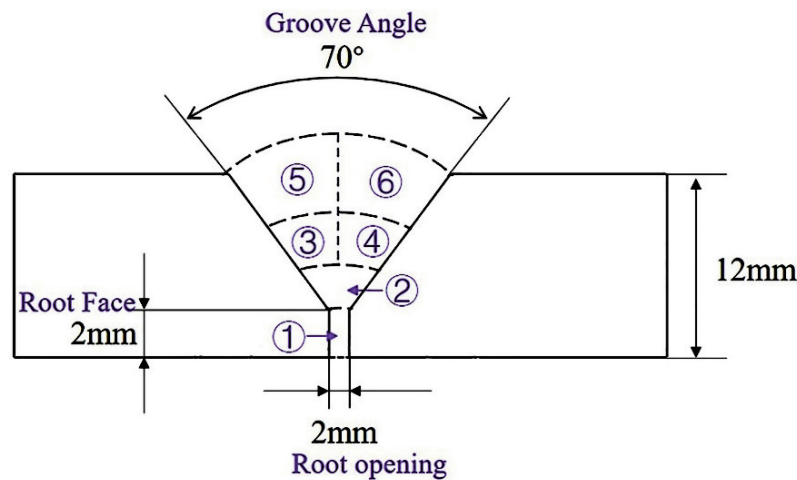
Schematic diagram of the welding groove and the distribution of welding beads
